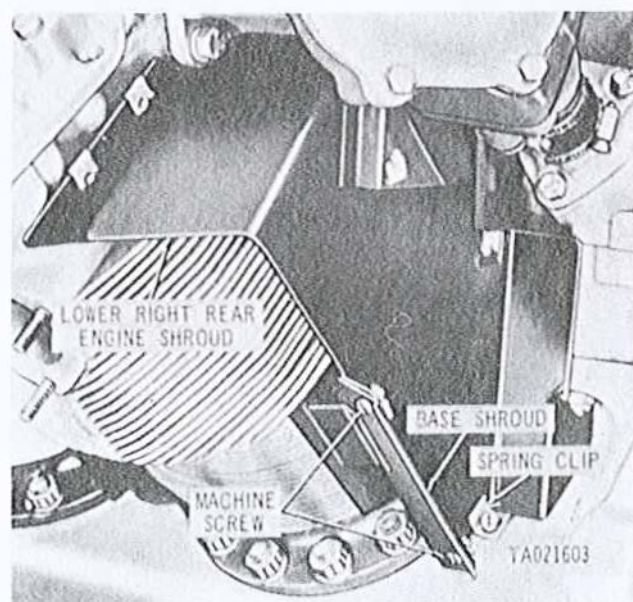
Removing or installing lower right engine shroud and base shroud.
